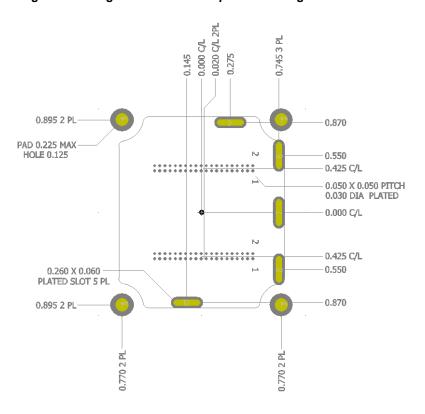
Single-Axis PCBA Footprint w/o Mating Connectors
